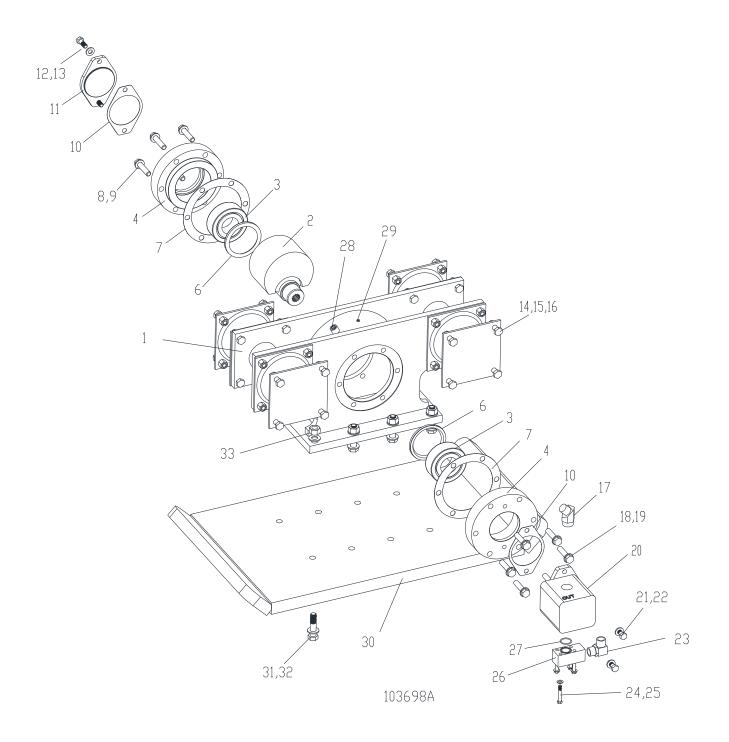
/ 103698(A) Dynamic Assembly with Earlier Bearing Housing Design
